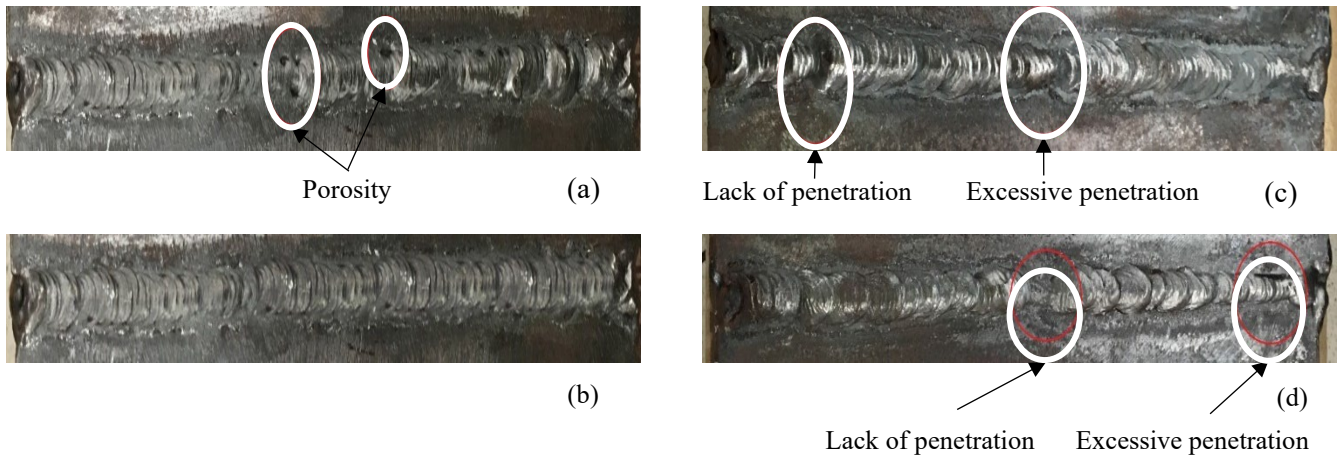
Pattern of Weld Root during welding for specimens welded with (a) 65A; (b) 70 A; (c) 80 A and; (d) 90 A
